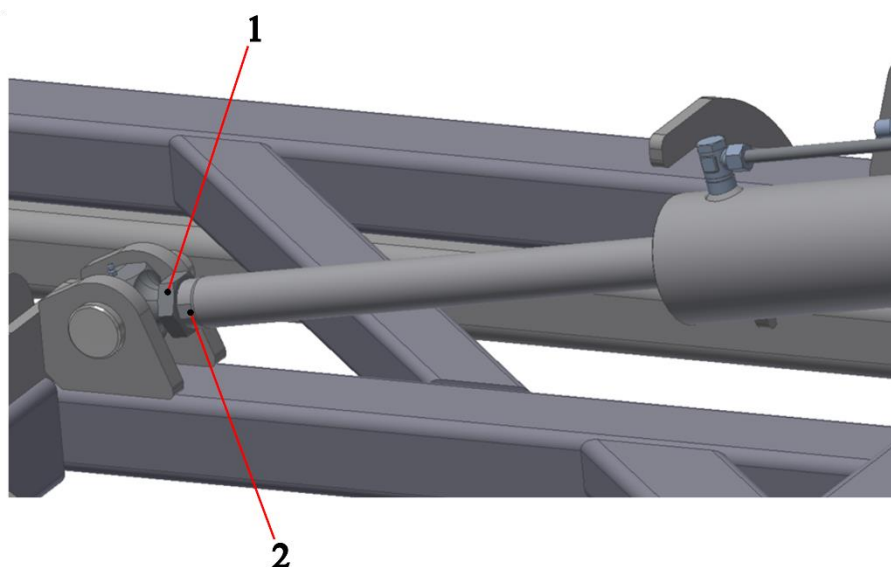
View of actuator with nut for levelling the machine (1 - lock nut; 2 - adjustment spot with spanner 41)
